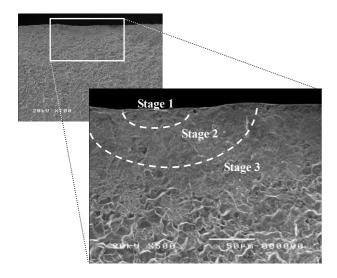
SEM photographs of a surface of a gear ruptured by bending fatigue
